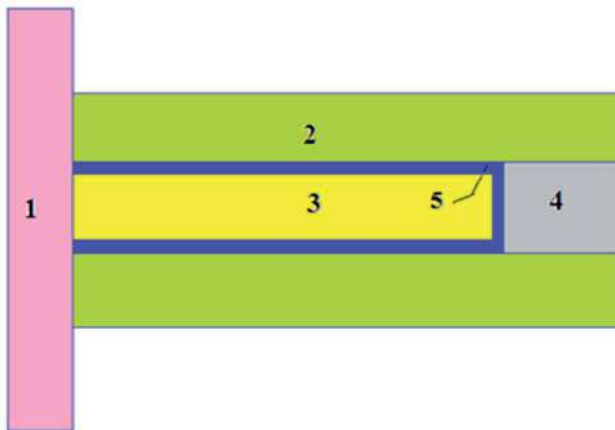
Magnetorheological design brake: 1 – shaft, 2 – casing, 3 – rotor, 4 – coil, 5 – MR fluid gap
